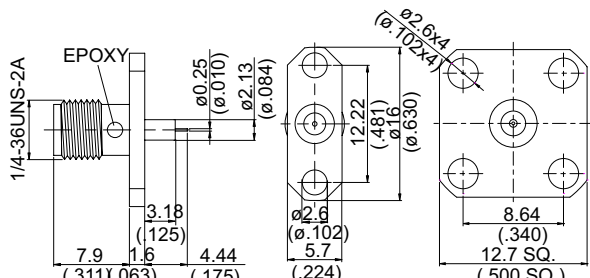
2-hole flange Fig. 1-2: square flange
